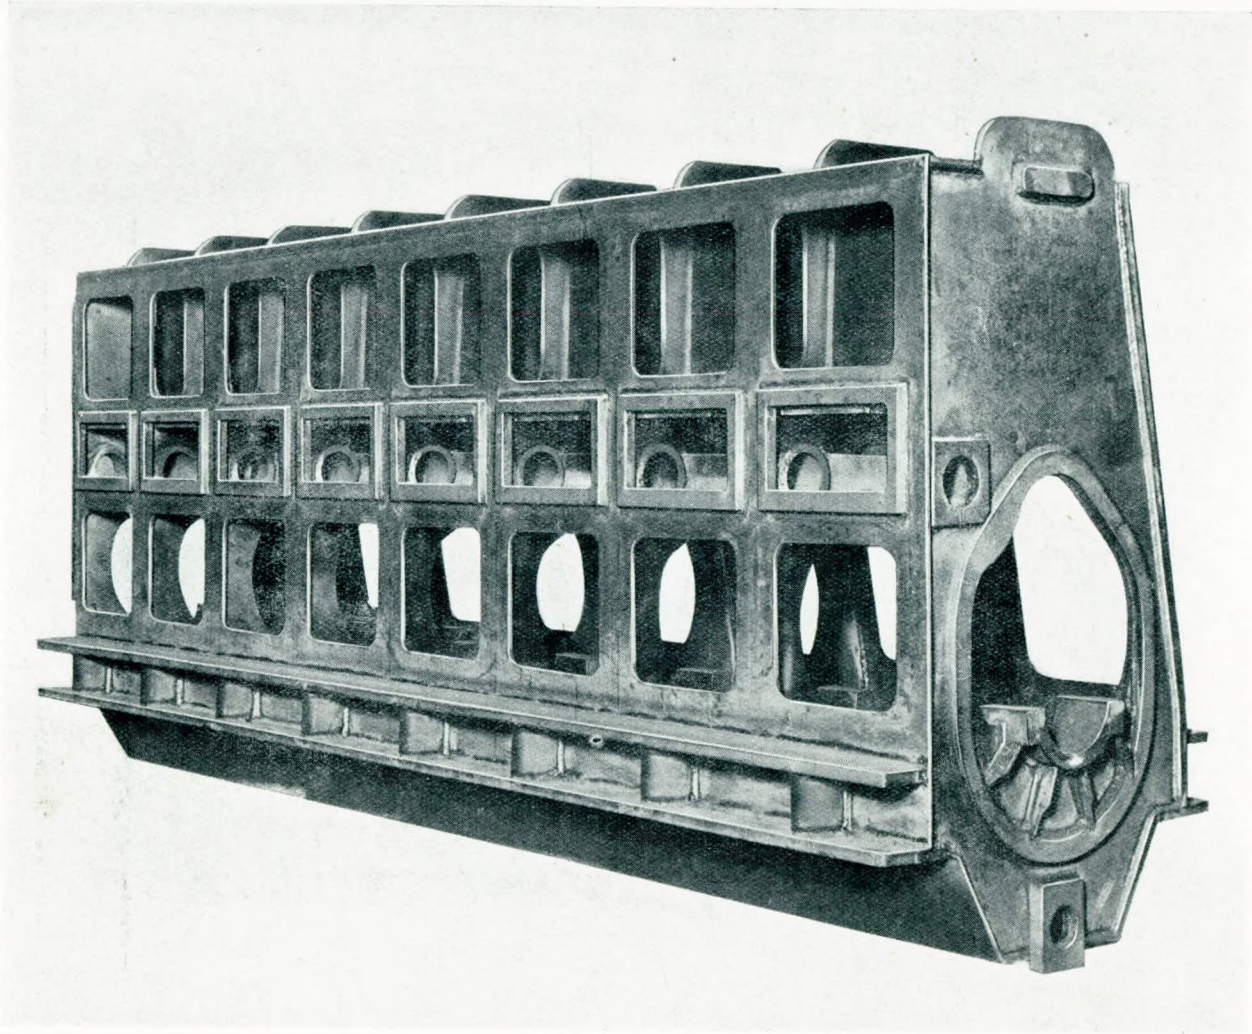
320-b.h.p. auxiliary engine. Front of completed frame.
